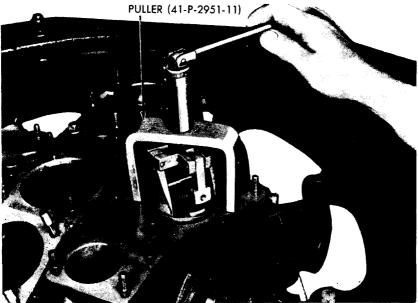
Removing Tachometer and Three-way Accessory Drive Adapter
